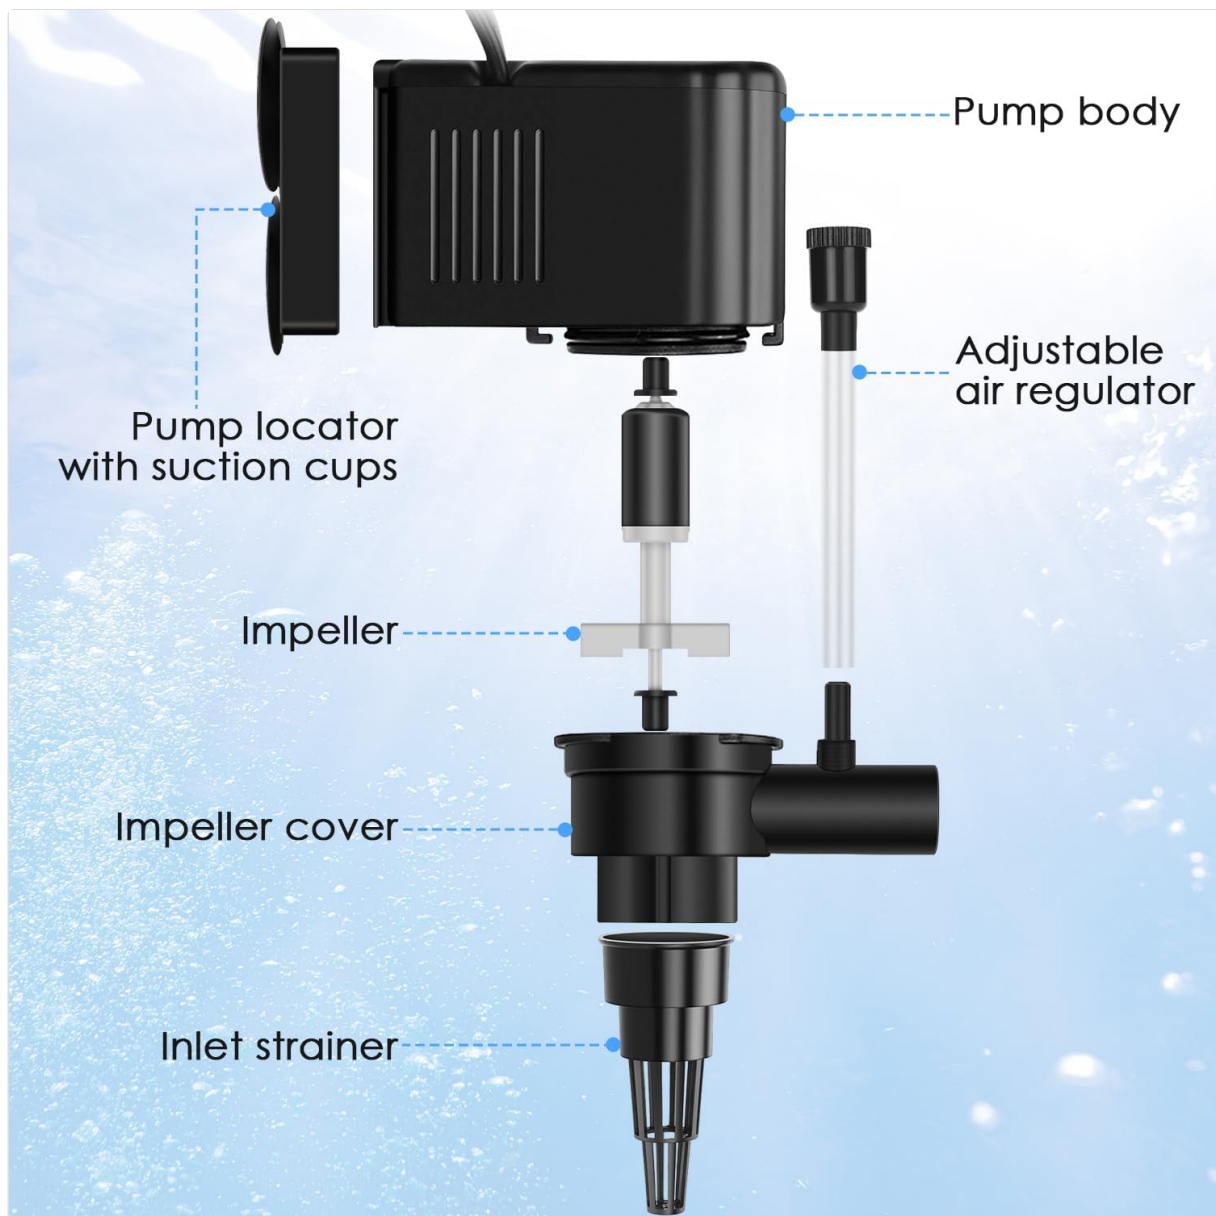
Exploded View of Pump Components. This image displays the disassembled parts of the AquaMiracle powerhead pump, including the pump body, pump locator with suction cups, impeller, impeller cover, adjustable air regulator, and inlet strainer. This view helps in understanding the internal structure and for maintenance purposes.
